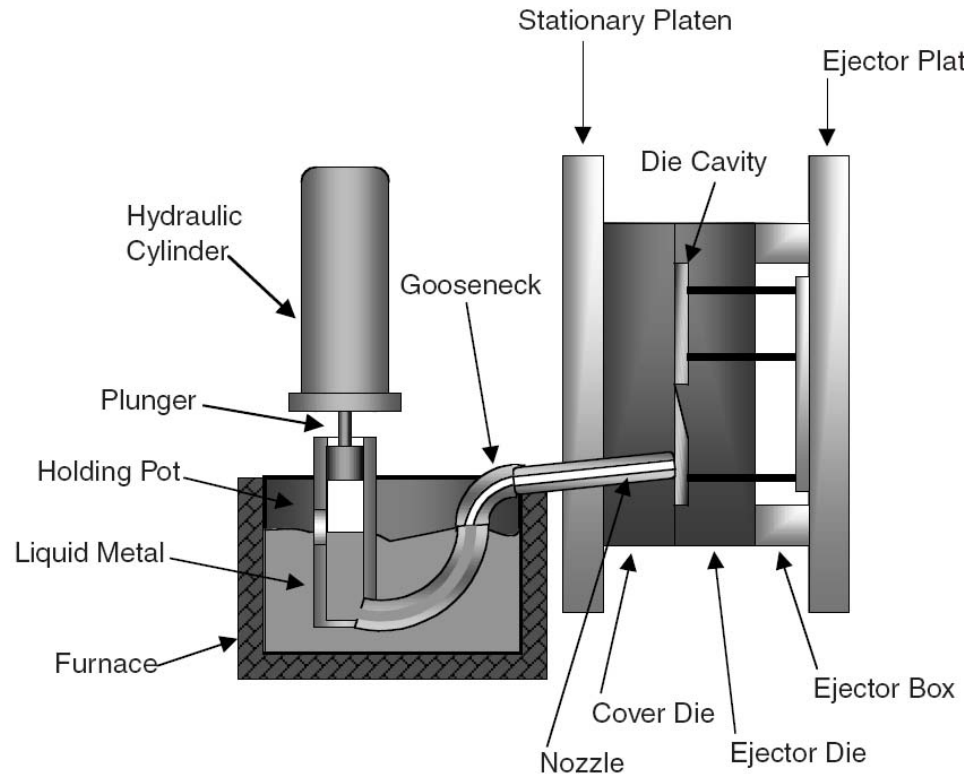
Graphical illustration of hot chamber die casting process [25].
